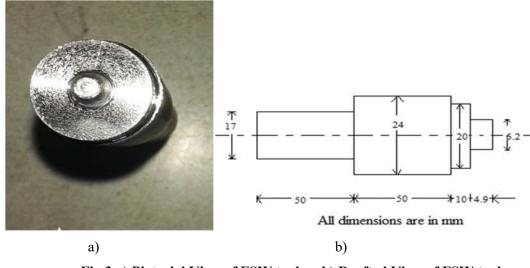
a) Pictorial View of FSW tool b) Drafted View of FSW tool
